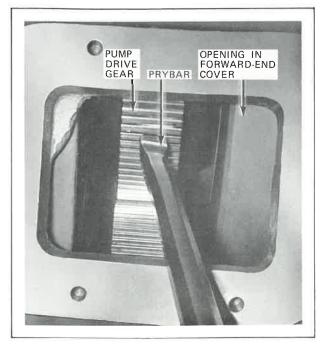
CHECKING INTEGRITY OF RUBBER-BONDED COUPLING WITH A PRY BAR.
